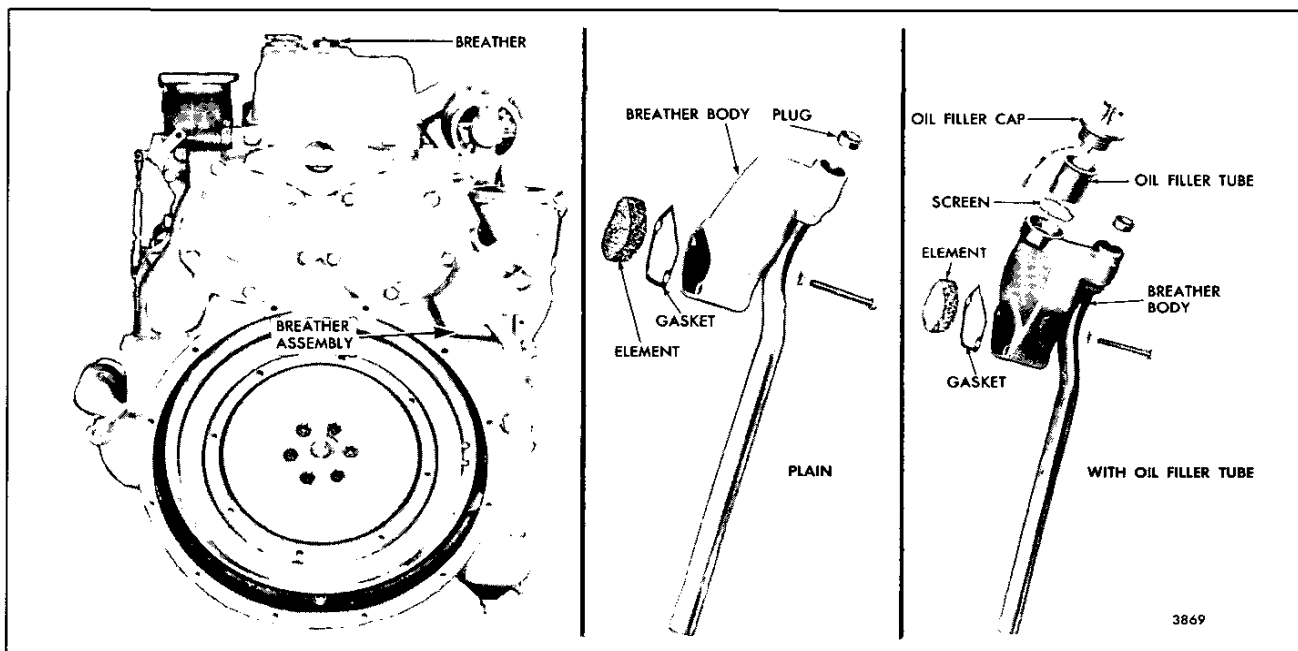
Crankcase Breather Mounting and Details (In-Line Engine)
